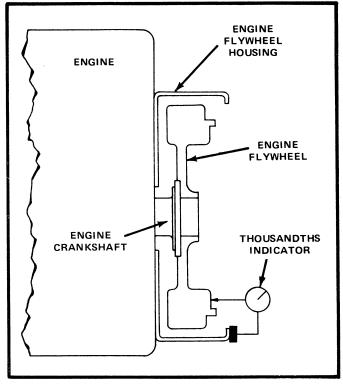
Checking the Driving Ring Surface of the Engine Flywheel.
